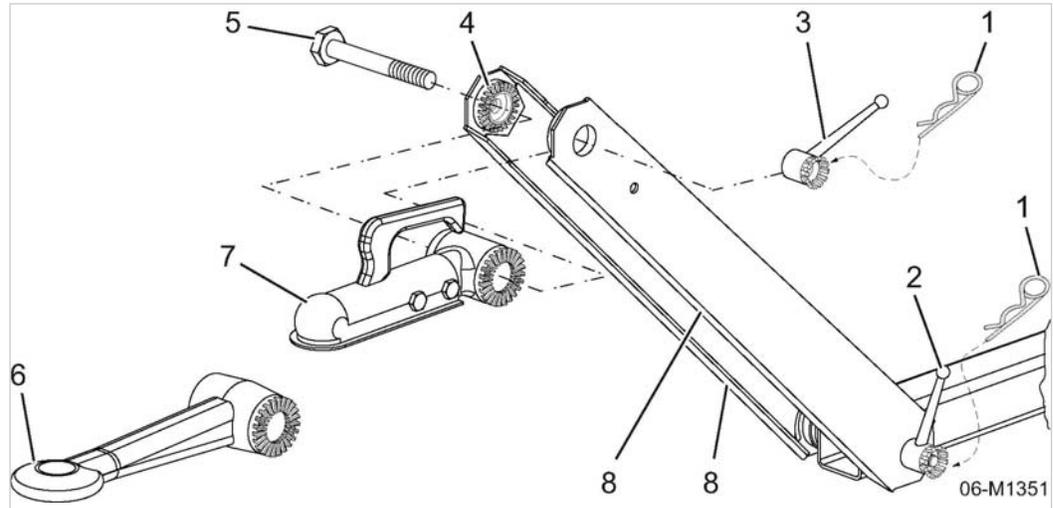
Changing the towing eye (height-adjustable drawbar)
